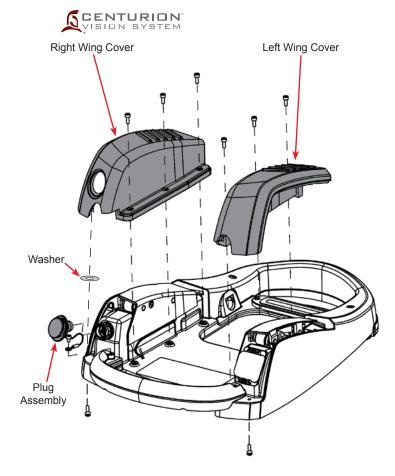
Footswitch Wing Covers and Connector Plug Assembly (shown without footpedal)
